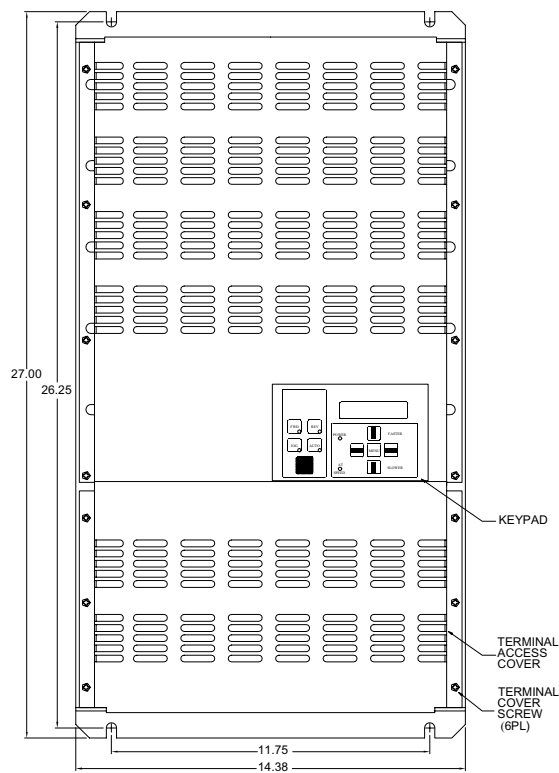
6500 CONTROLLER MOUNTING DIMENSIONS, 40 - 75HP, 460V
